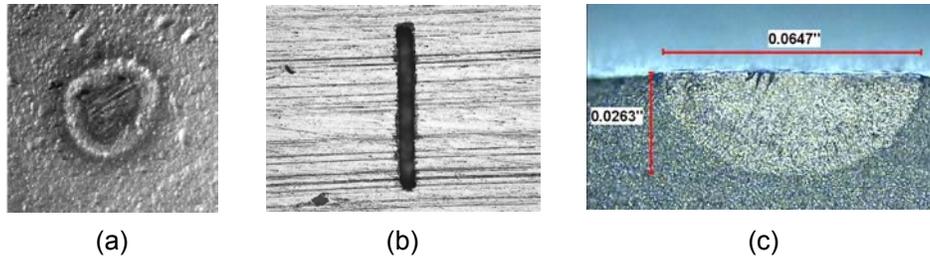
(a) TYPICAL SPOT WELD, (b) EDM NOTCH USED AS STRESS RISERS TO INITIATE CRACKING IN LCF SAMPLES, AND (c) TYPICAL CRACK ASPECT RATIO
